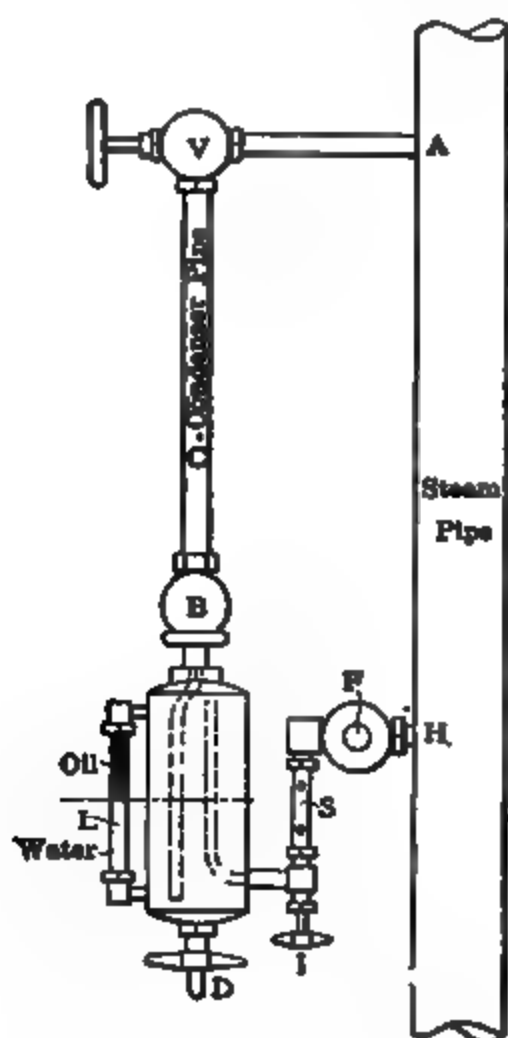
Engine Cylinder Lubricator Operated by Pressure of Column of Condensed Steam.
